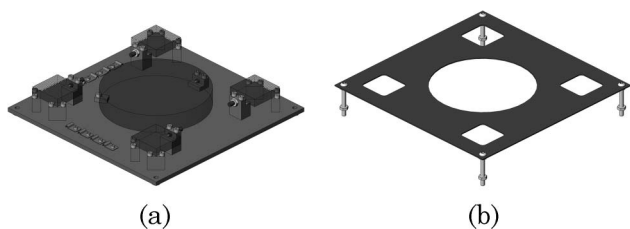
Test plate B with (a) samples and (b) reusable protective shield.
